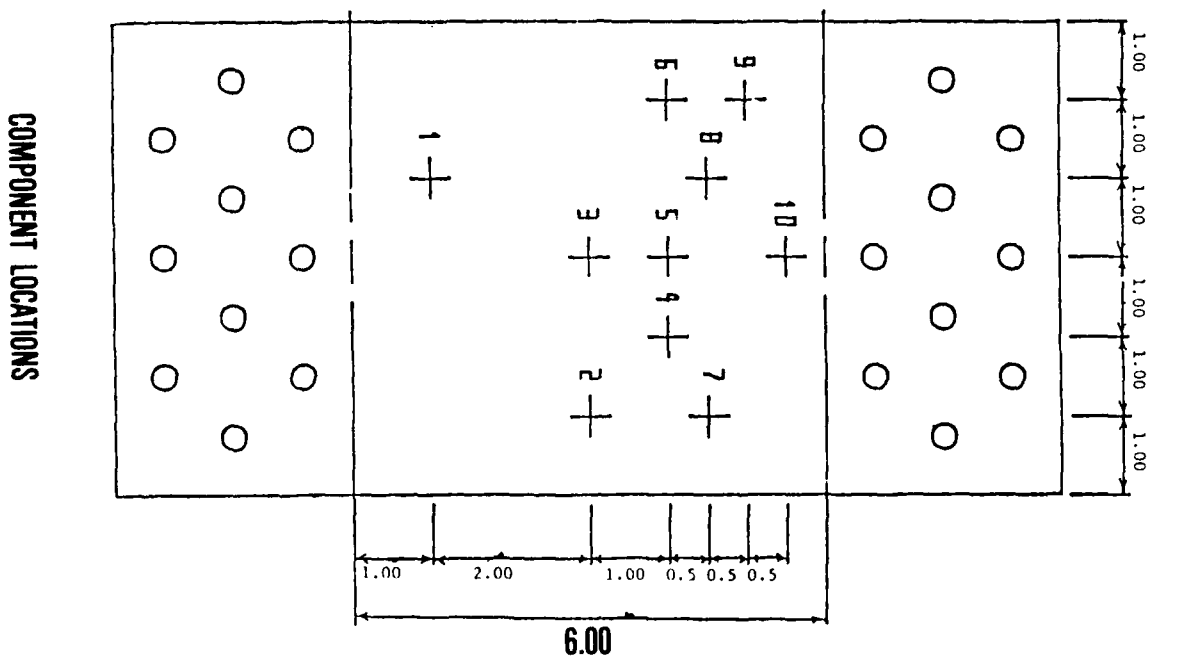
COPPERCLAD & STEEL PLATE (TWO EDGES FIXED) COMPONENT & ACCELEROMETER LOCATIONS
